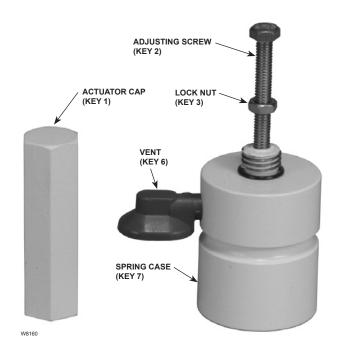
Spring Case, Adjusting Screw, and Actuator Cap
